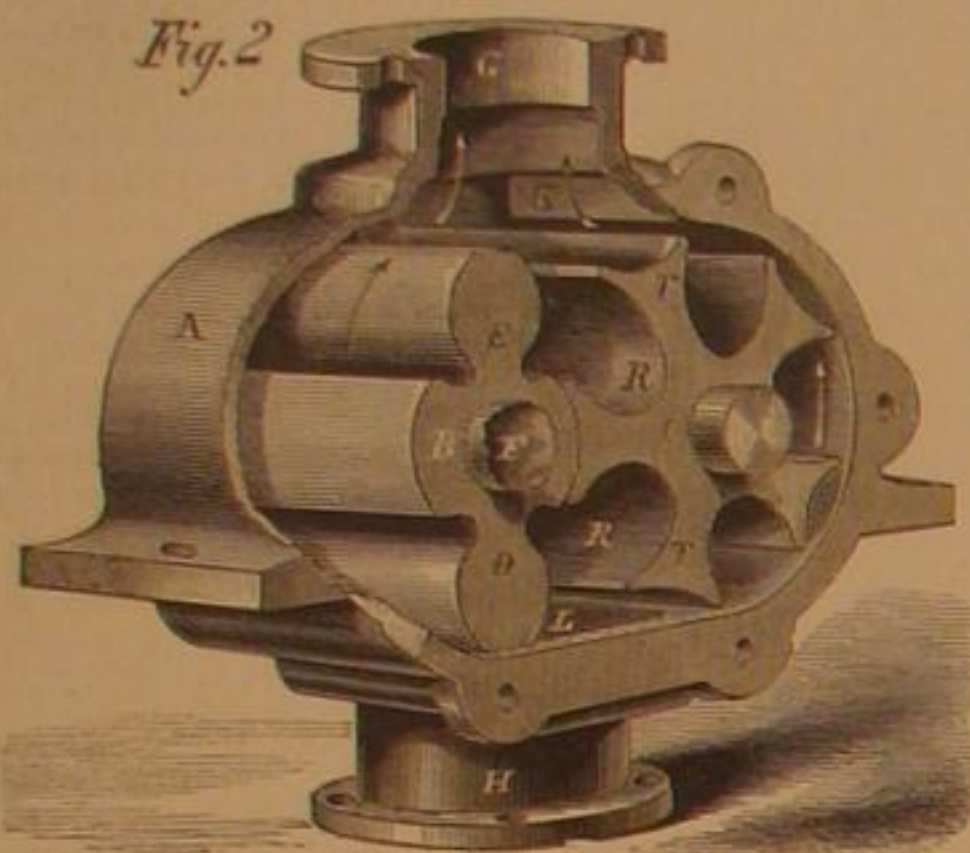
is a perspective view with cover or head removed, showing the interior mechanical arrangement.
